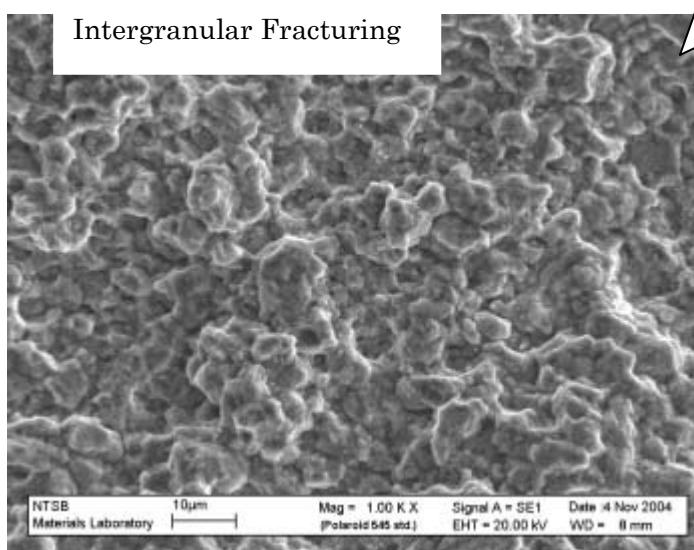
Lenticular Seal Tooth #1 Axial Crack
